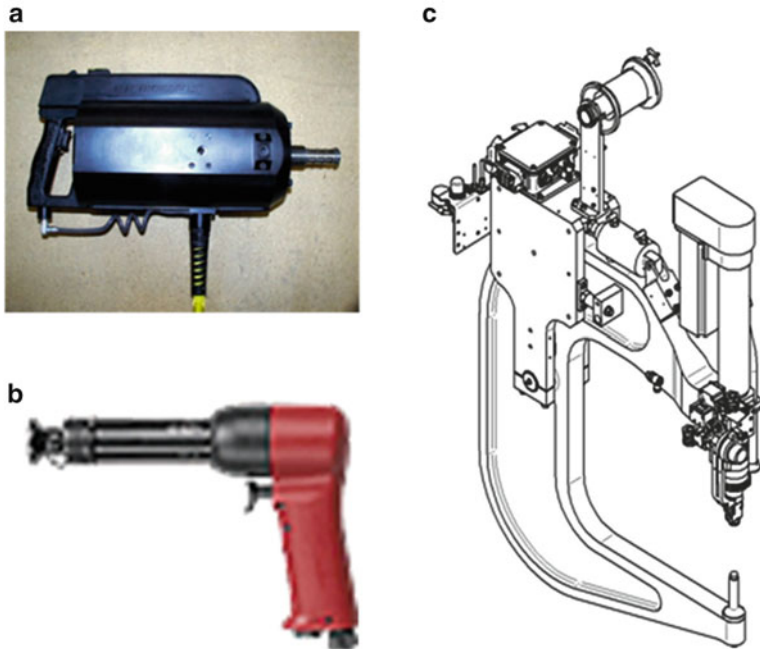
Various rivet tools. (a) Squeezing riveter: length >24", weight > 50 lbs. (b) Percussive rivet gun: length <10" weight < 5 lbs. (c) C-frame rivet tooling
